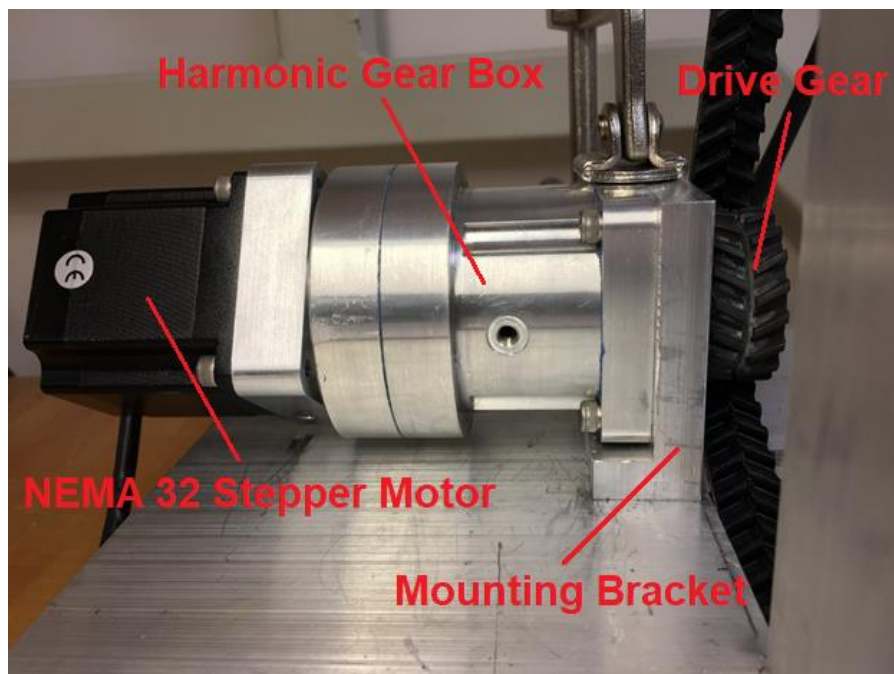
Motor Drive Assembly held in position via temporary C-Clamp
